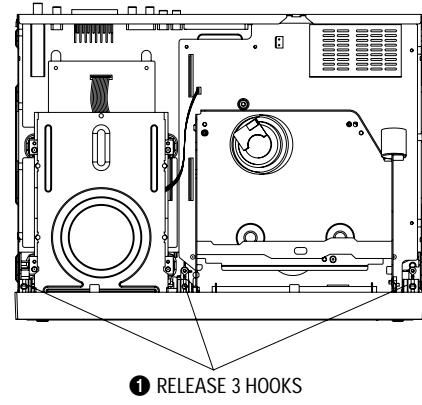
Ass'y Front Panel Removal(Top View)
